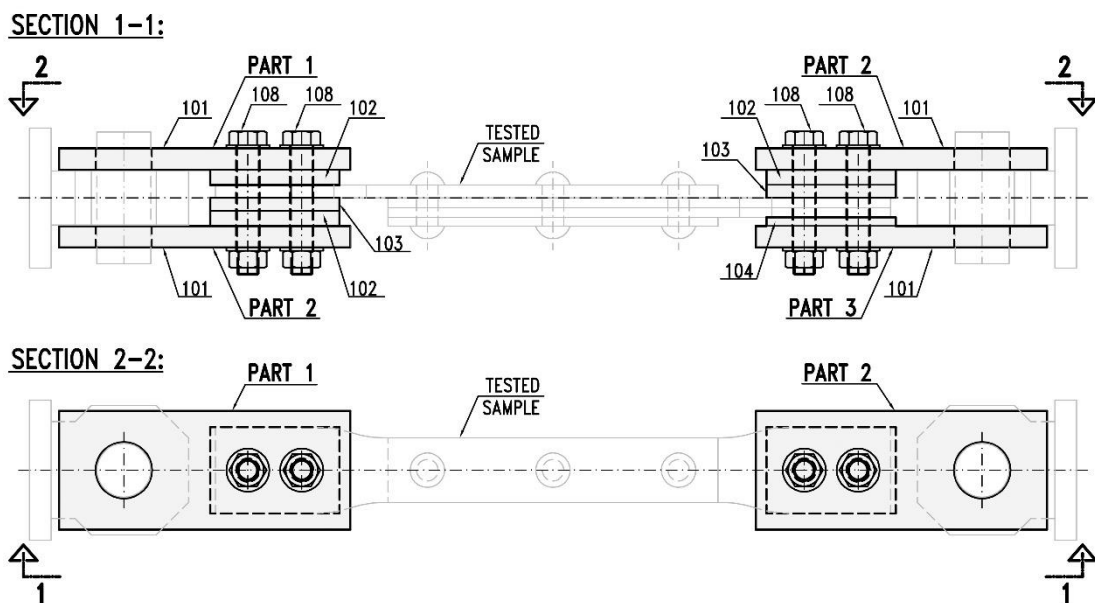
Fixing device for fixing of tested samples during experimental test (drawing)
